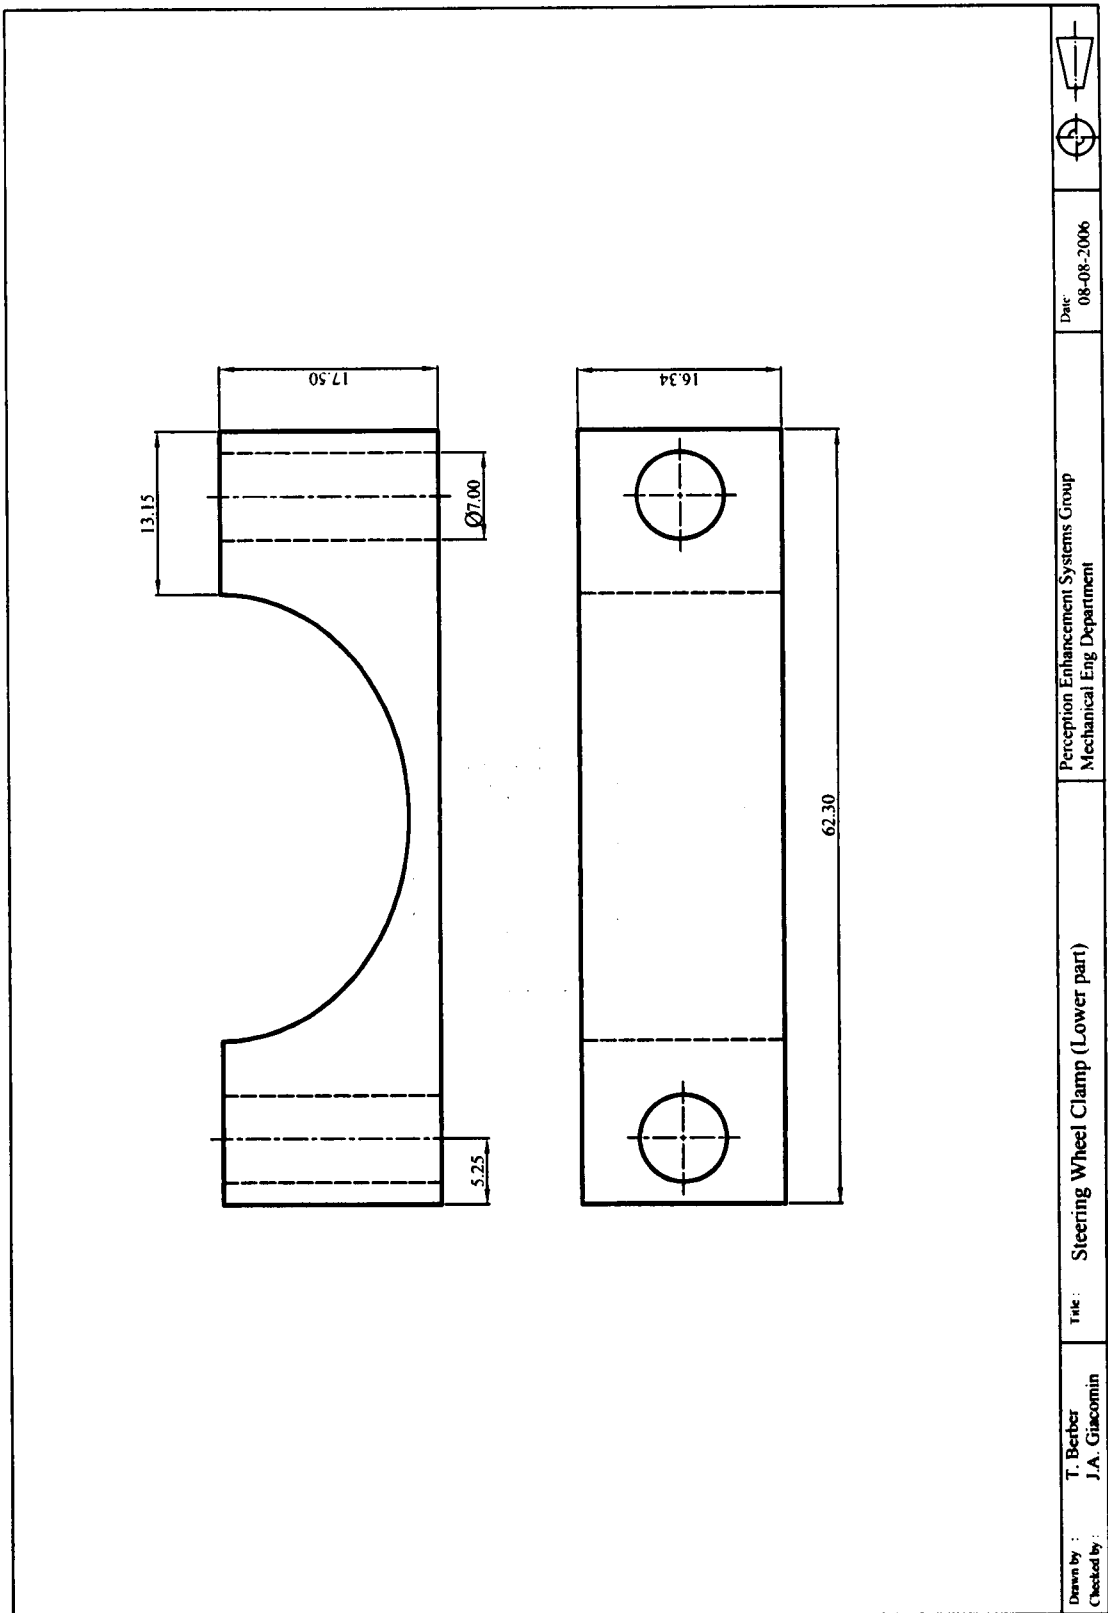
Geometrical dimensions of the lower part of the steering wheel clamp used to measure the steering wheel vibration for the Uxbridge test.
